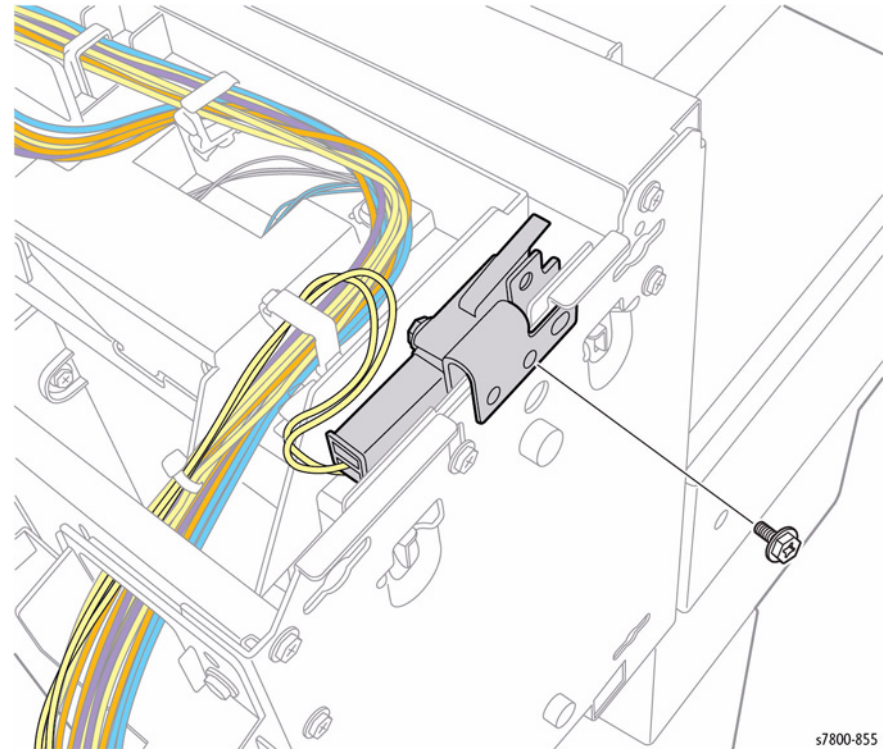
Removing the Booklet Stapler Rear Safety Switch
